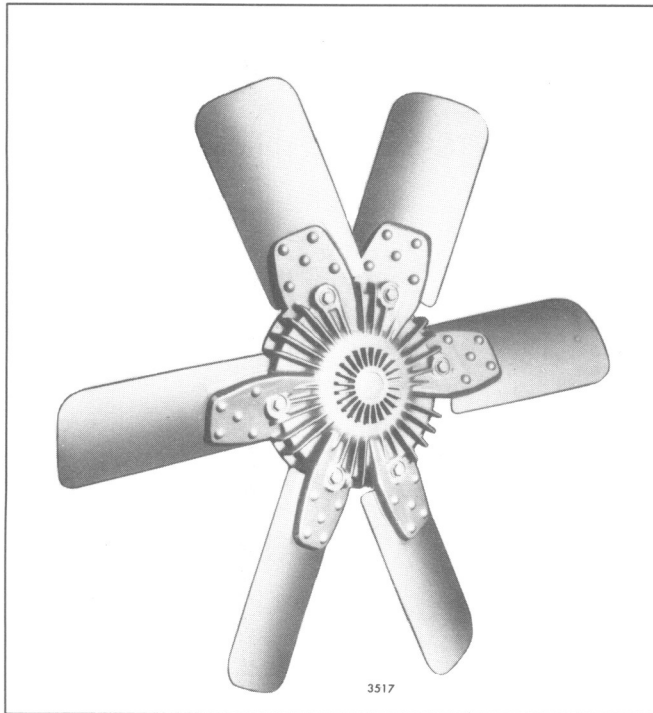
Typical Thermo-Modulated Fan Assembly
